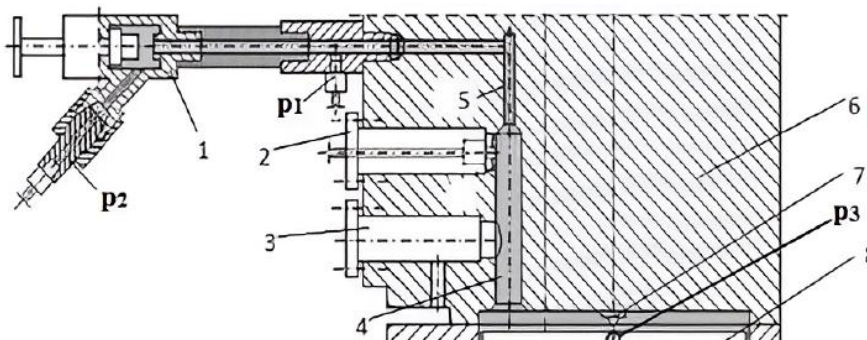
The arrangement of cylinder pressure sensors in the engine head for experimental tests.
